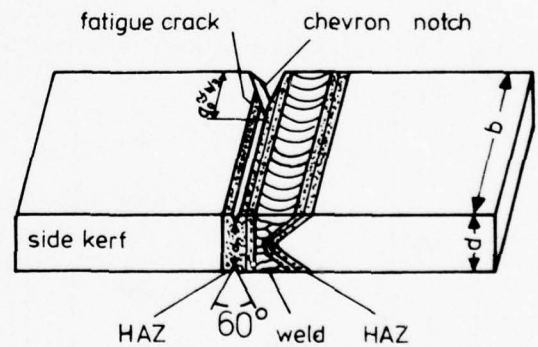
Specimen with side groovings for fracture toughness testing of the heat affected zones
